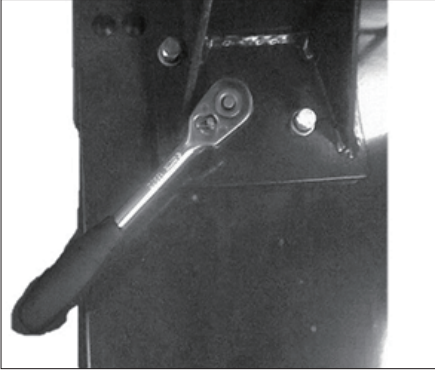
After opening the packaging box, take out the accessory box (1), Tire-Pressing Arm (5) and Column Assembly (2); fix the box in place according to the Fig. (4); and unscrew the hex head screws (4), spring washers and plain washers from the box.
